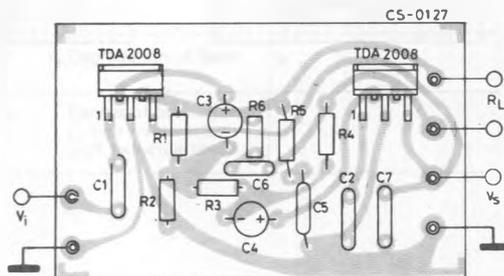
P.C. board and component layout for the circuit of fig. 3 (1:1 scale)
